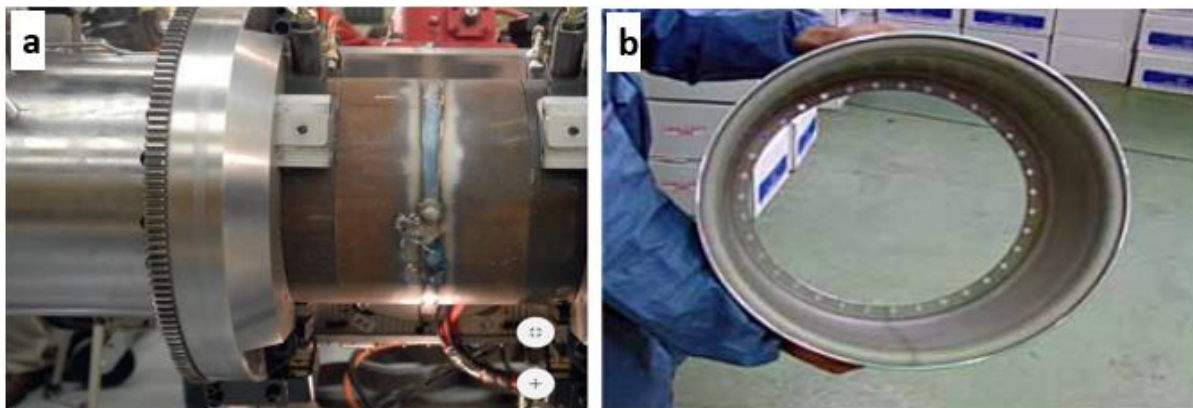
Miscellaneous application of friction stir welding (a) Orbital friction stir welded steel pipe (obtained from <http://assets.esab.com/asset-bank/assetfile/12296.pdf>) [28] (b) Aftermarket three-piece wheel constructed from friction stir welded and spinformed aluminium cylinders [29]
